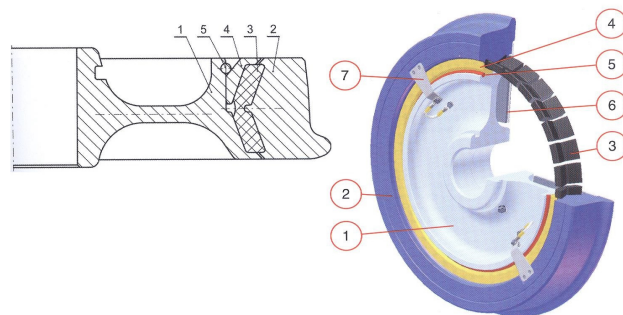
A tyre wheel provided with a silencer [8]: 1 – wheel centre, 2 – tyre; 3 – rubber blocks; 4 – locking ring; 5 – clamping ring; 6 – silencer; 7 – earthing
